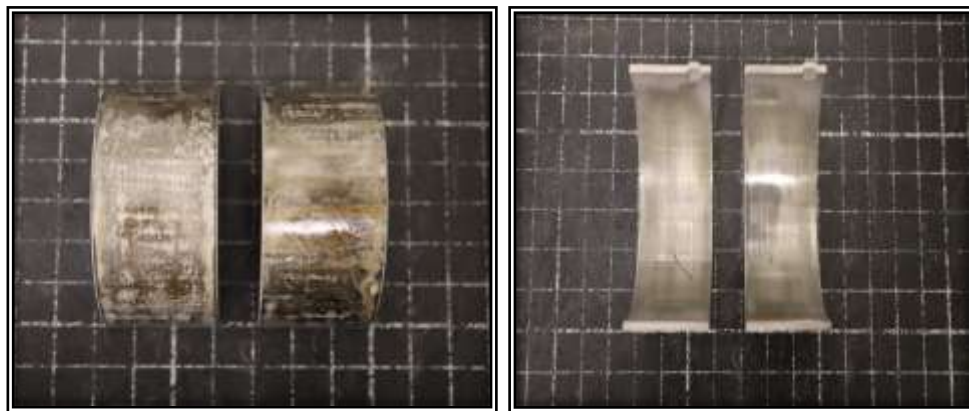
The connecting rod bearings after being removed from the number 2 connecting rod assembly. A jagged scratch was observed on one of the bearings, with standard wear otherwise.
